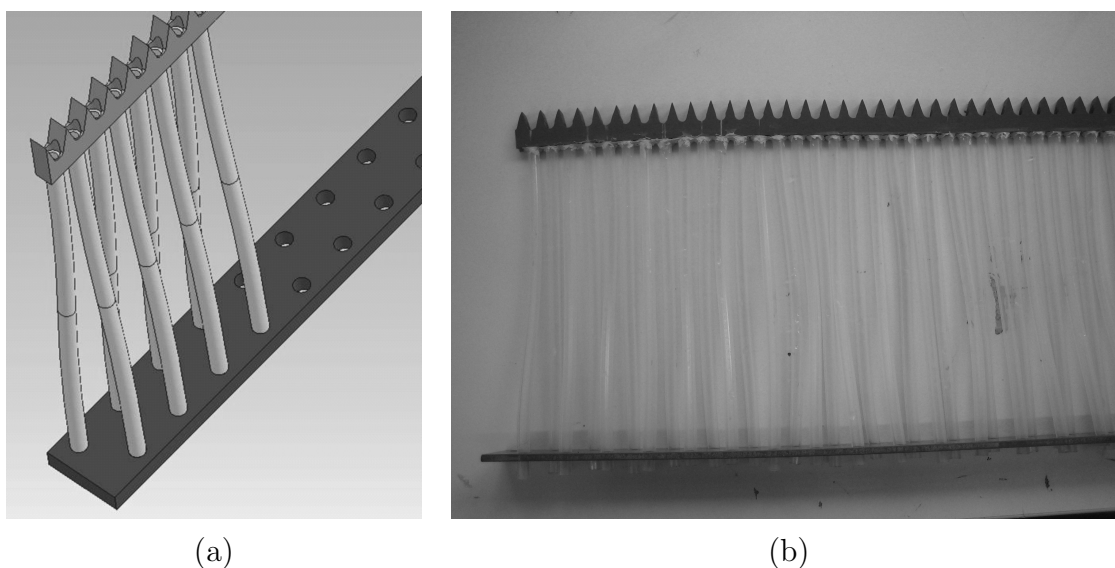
Liquid separator with flexible tubes (a) schematic drawing (b) manufactured device
